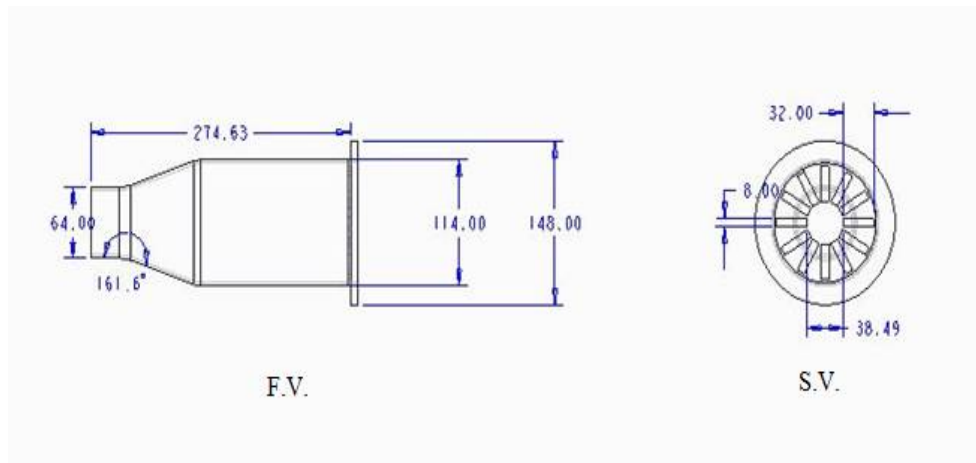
Figure.III.II. Two dimensional sketch of burner with diffuser ring
